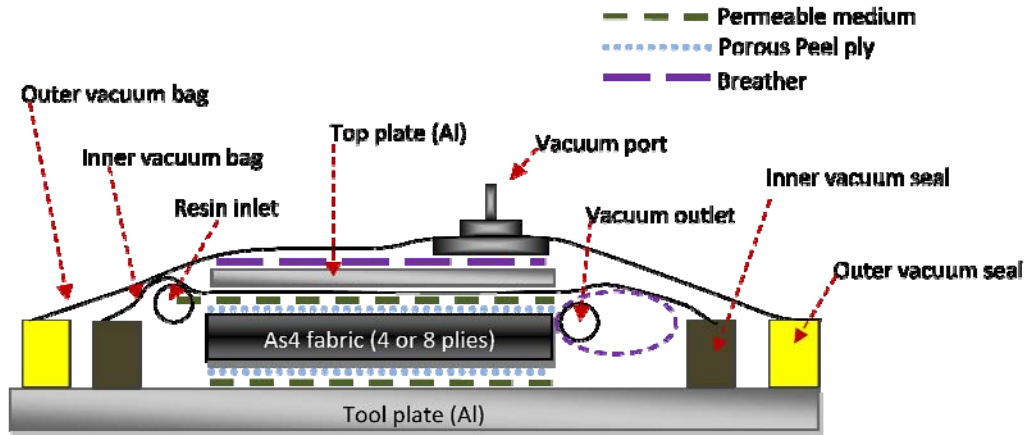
Vacuum assisted resin transfer molding (VARTM) set-up.
